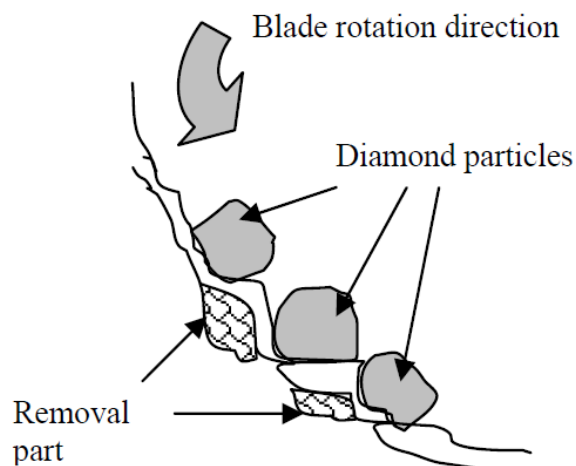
Material removal mechanism of the diamond particles on the blade edge. [23]
